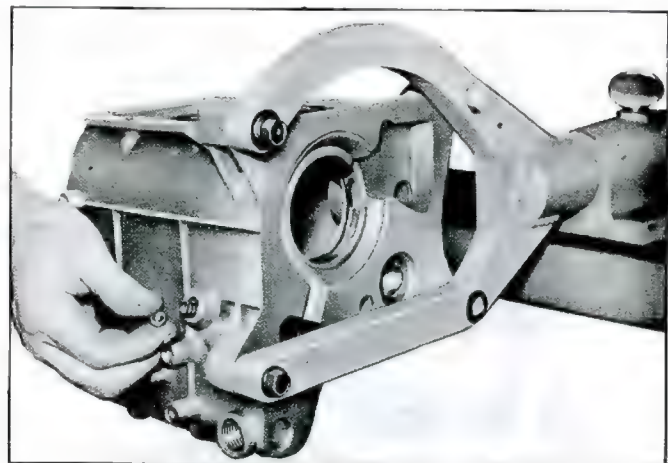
A-17—Installing Detent Spring and Ball for First and Reverse Shift Fork Shaft
